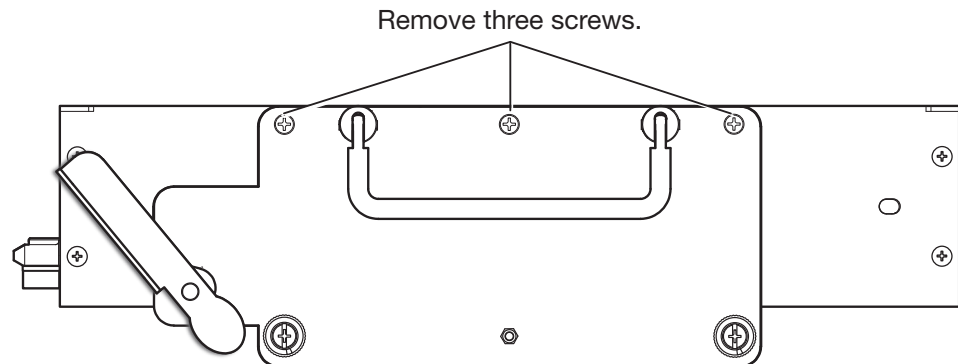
Removing the Plate from the Failed Redundant Power Supply Front Panel
